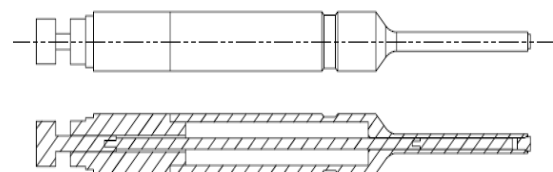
Drawing of LVDT core for fuel displacement measurement
